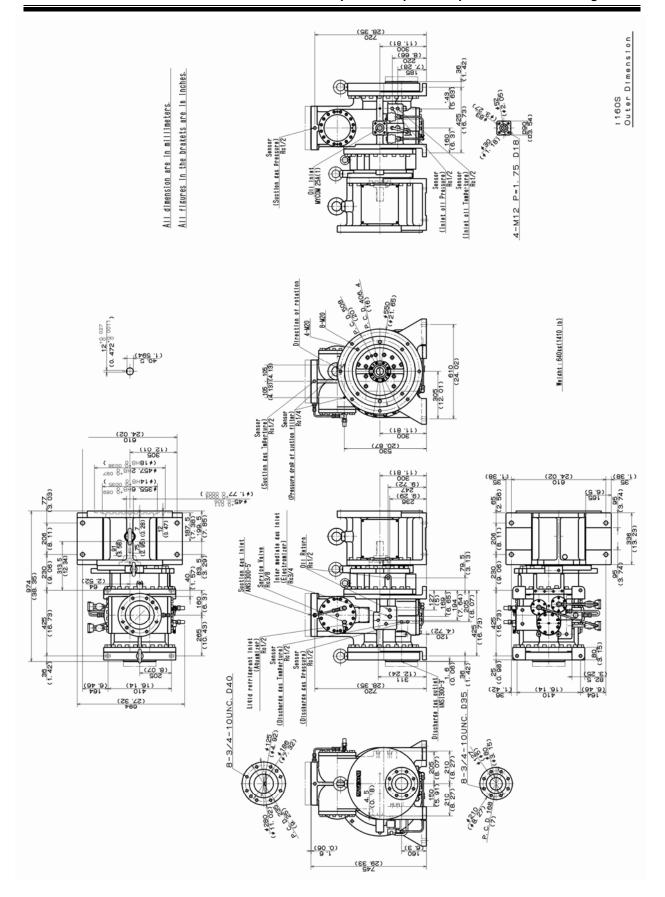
i160S Outer Dimensions with a Spacer for Flange Motor (NEMA)
